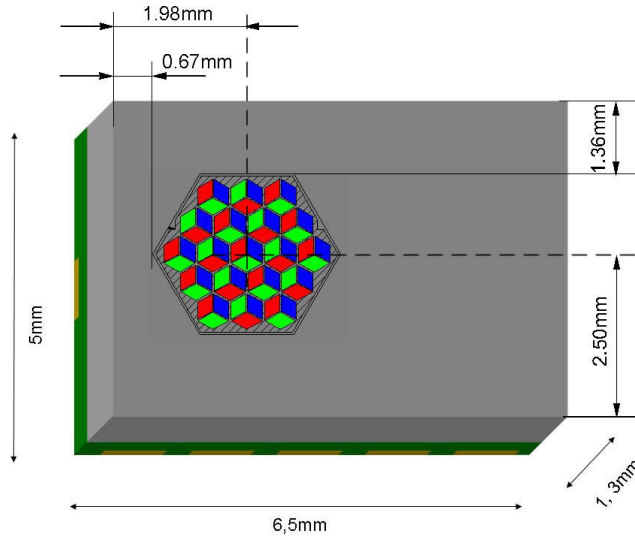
Sizes of packaged MTCS-TIAM4 in LCC (height = 1300±50µm), other tolerances are 100µm
